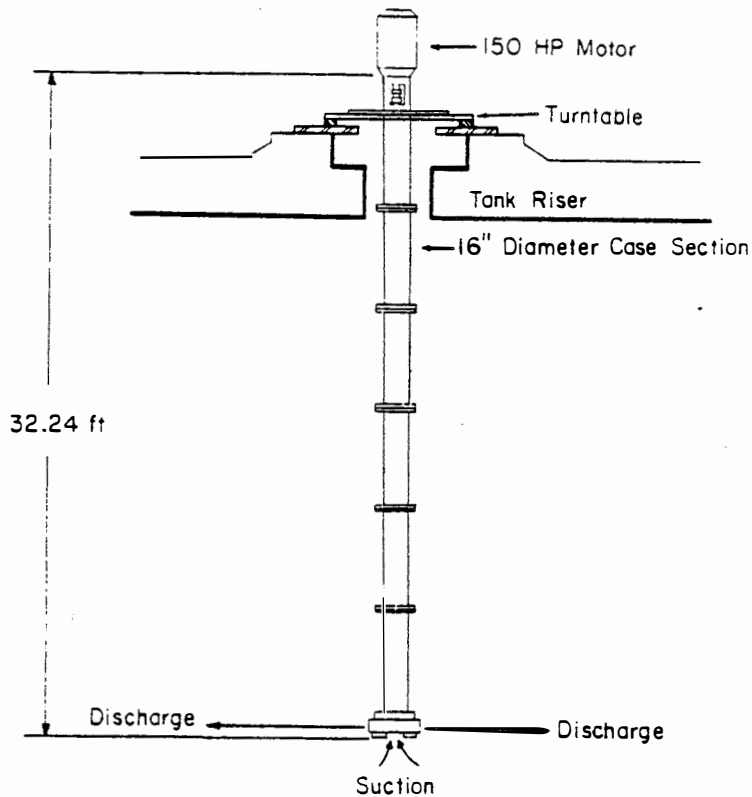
Proposed Mounting of Slurrying Pump in Waste Tank Riser at Savannah River
